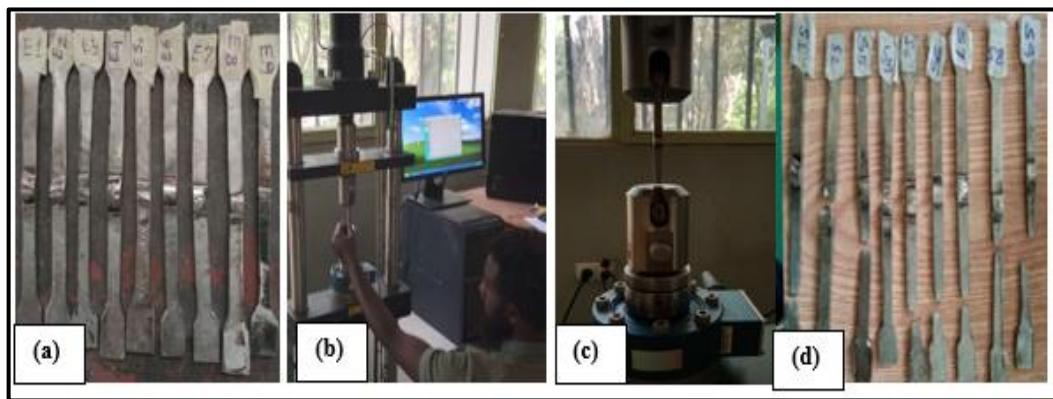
Specimen prepared for tensile strength, (a) Tensile Specimens (b) set-up, and (c) fractured specimen after force applied (d) fractured specimens (at Adama Science and Technology University)
